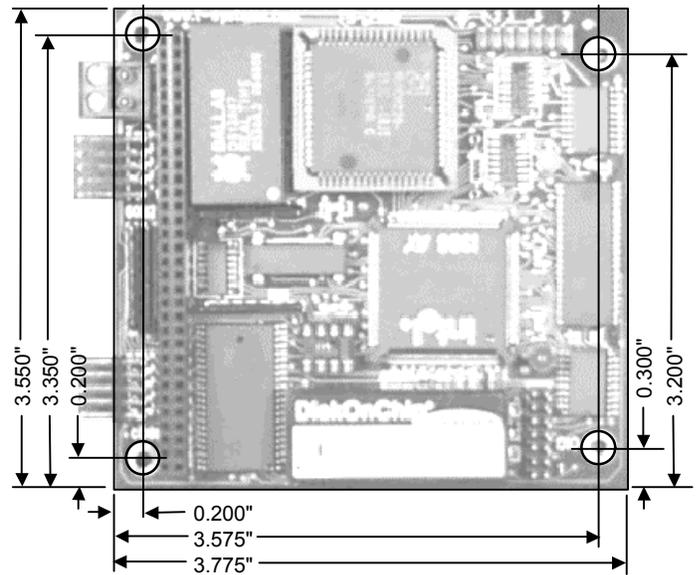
Board Dimensions (standard PC/104 8-bit module dimensions)
